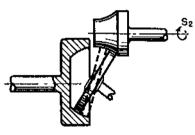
A disk contacts two differential rollers. The rollers and their bevel gears are free to rotate on shaft  $S_2$ . The other two bevel gears are free to rotate on pins connected by  $S_2$ . This drive is suitable for the accurate adjustment of speed.  $S_2$  will have the differential speed of the two rollers. The differential assembly is movable across the face of the disk.
